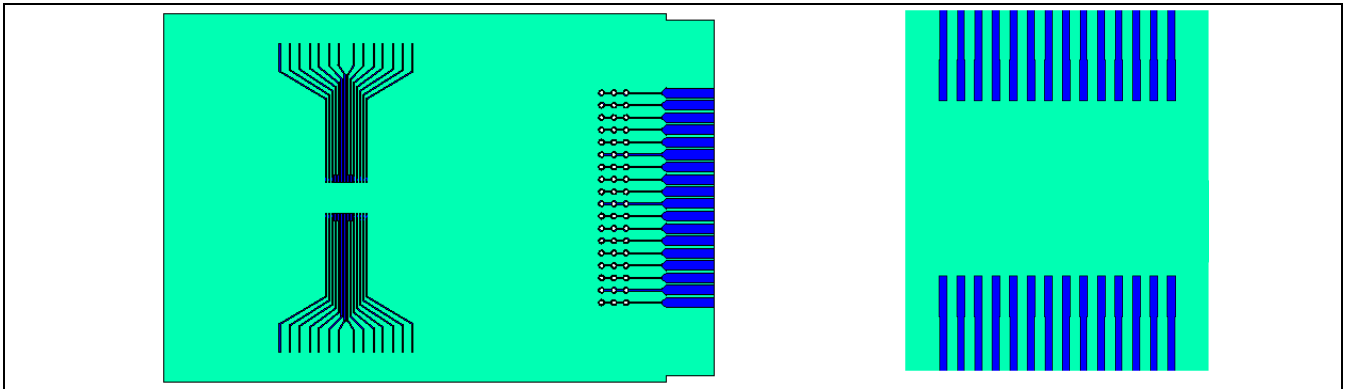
PCB reference layout (according to JEDEC 1s0P)
